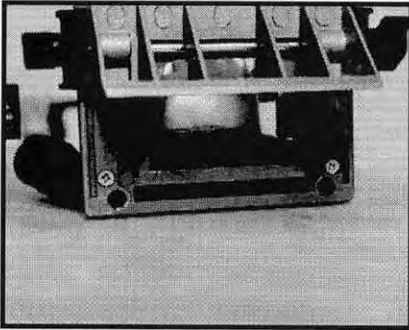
Removing the JS100A's horizontal screws for disassembly
